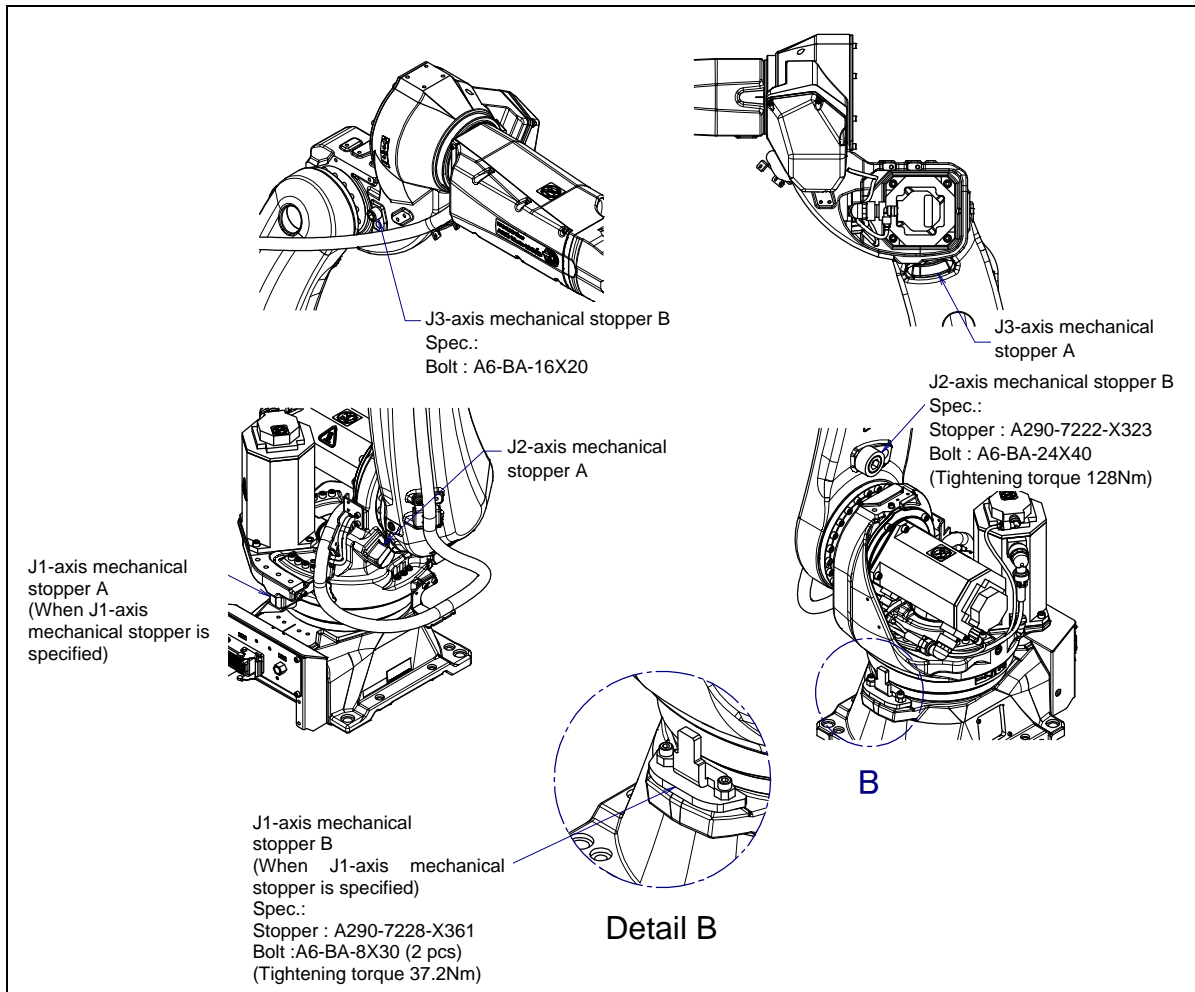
(a) Check of fixed mechanical stopper and adjustable mechanical stopper
